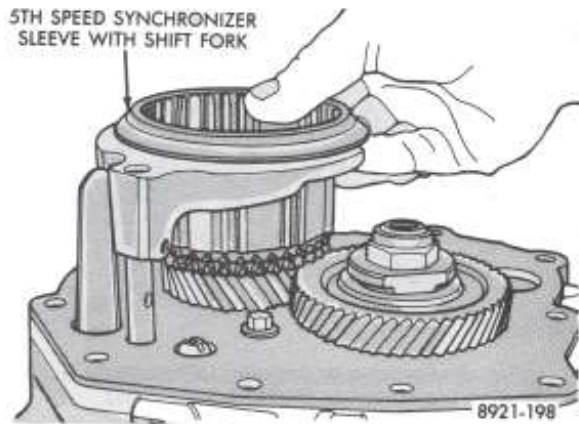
Remove or Install 5th Speed Synchronizer Sleeve and Shift Fork
